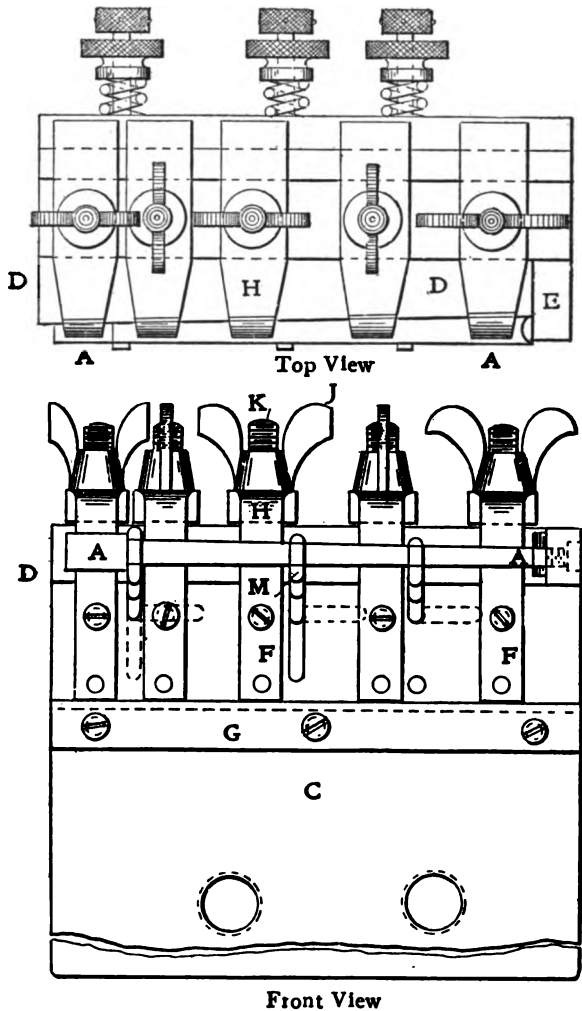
Grinding Fixture for Work, Figs. 96 and 97.
